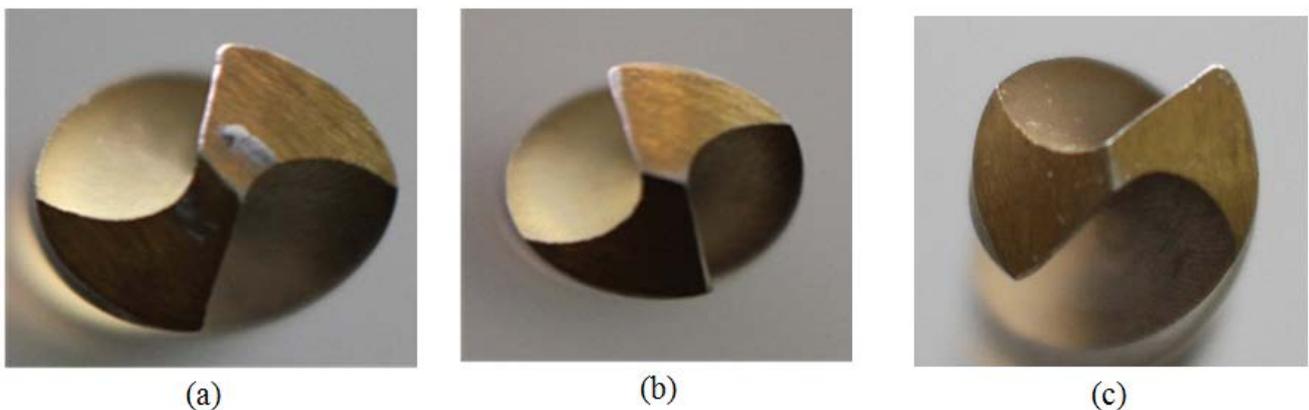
Photographic view of tool wear; (a) Dry condition (b) Cutting fluid (c) Vegetable oil (Olive oil)
